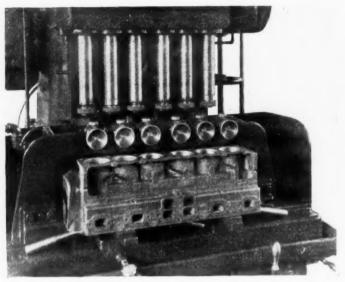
Pratt & Whitney six-spindle cylinder grinding machine
